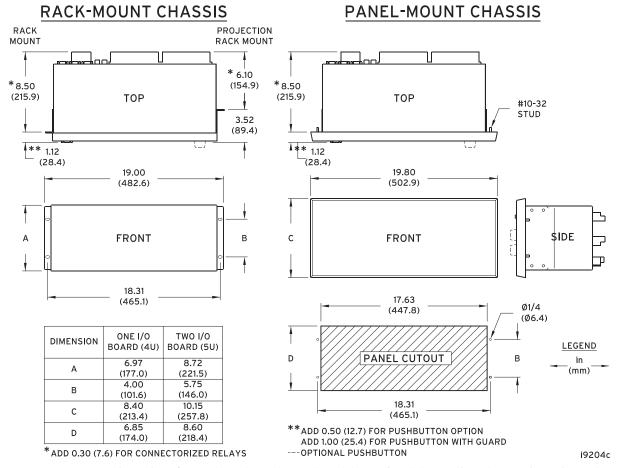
SEL-487V Dimensions for Rack- and Panel-Mount Models (Horizontal Mounting Shown; Dimensions Also Apply to Vertical Mounting)
